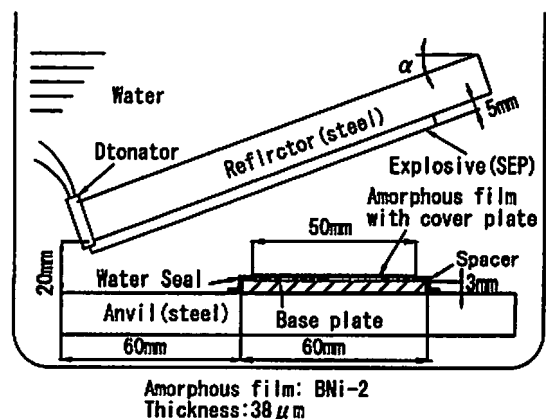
Explosive welding set-up using underwater shock wave
